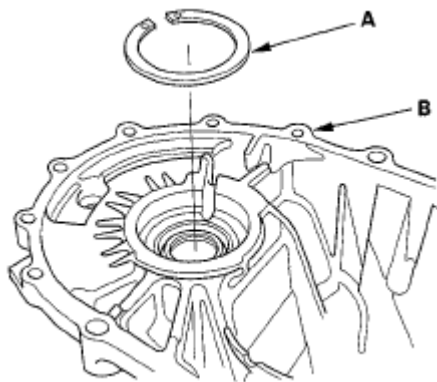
Identifying Shim, Transmission Housing And Same Sized Shim
